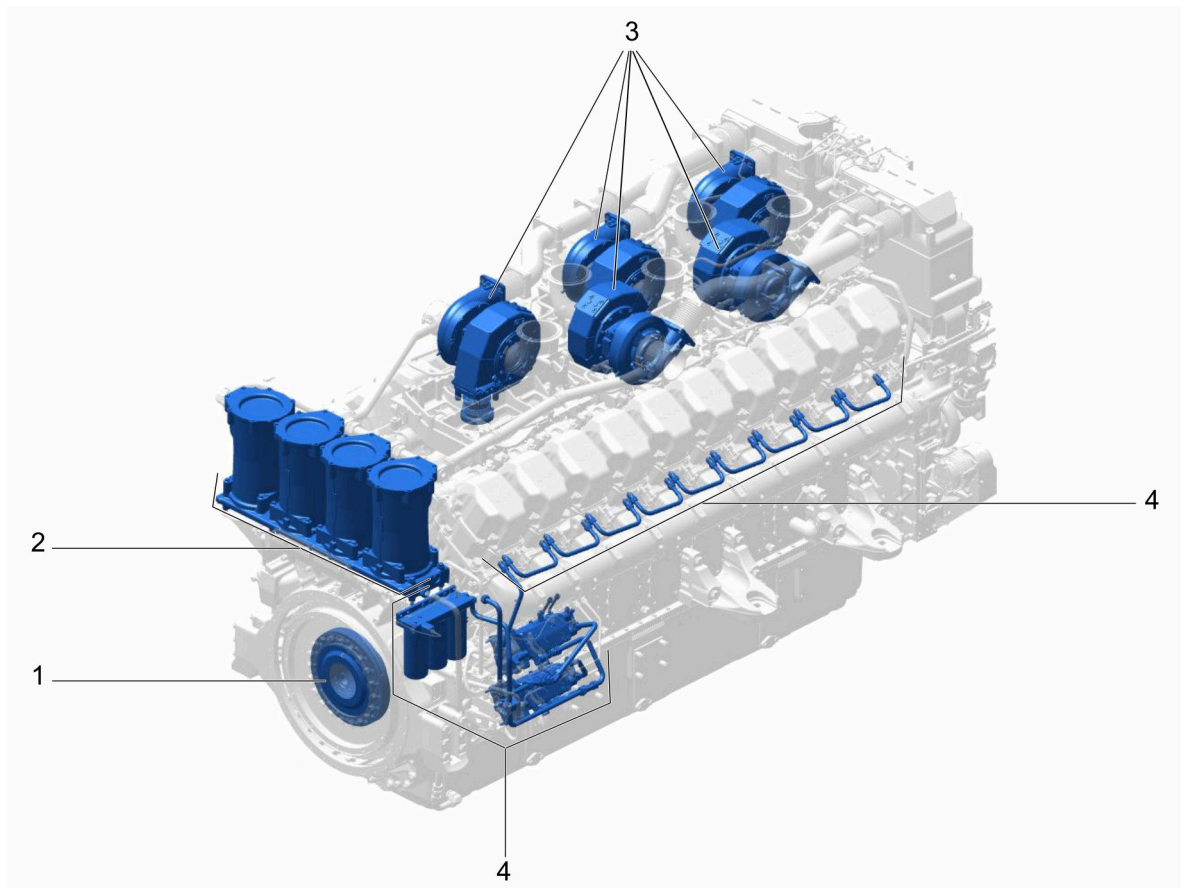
Visual inspection of Diesel engine (1)
